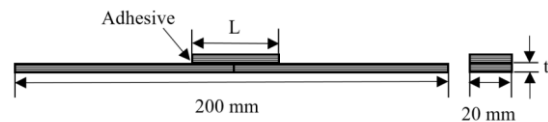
Illustration of adhesively bonded specimen with single strap joint
